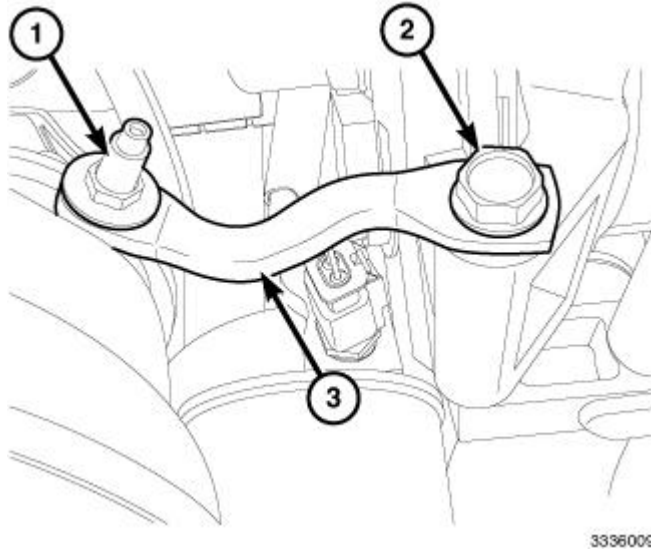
Engine Mount Isolator Retaining Nut, Generator Support Bracket & Retaining Bolt
